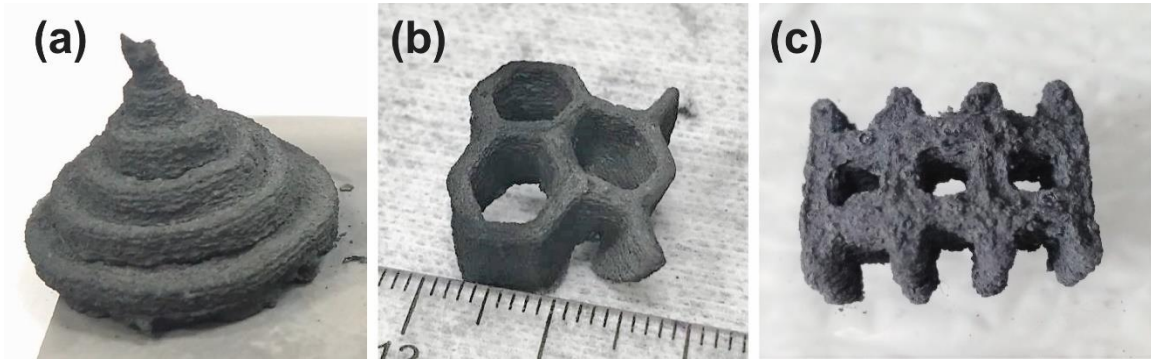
Different complex shapes fabricated by the 3D printing of WC. (a) A stepped cylindrical structure of 3D printed WC. (b) A hexagonal honeycomb structure of 3D printed WC. (c) A rectangular honeycomb structure of 3D printed WC.
